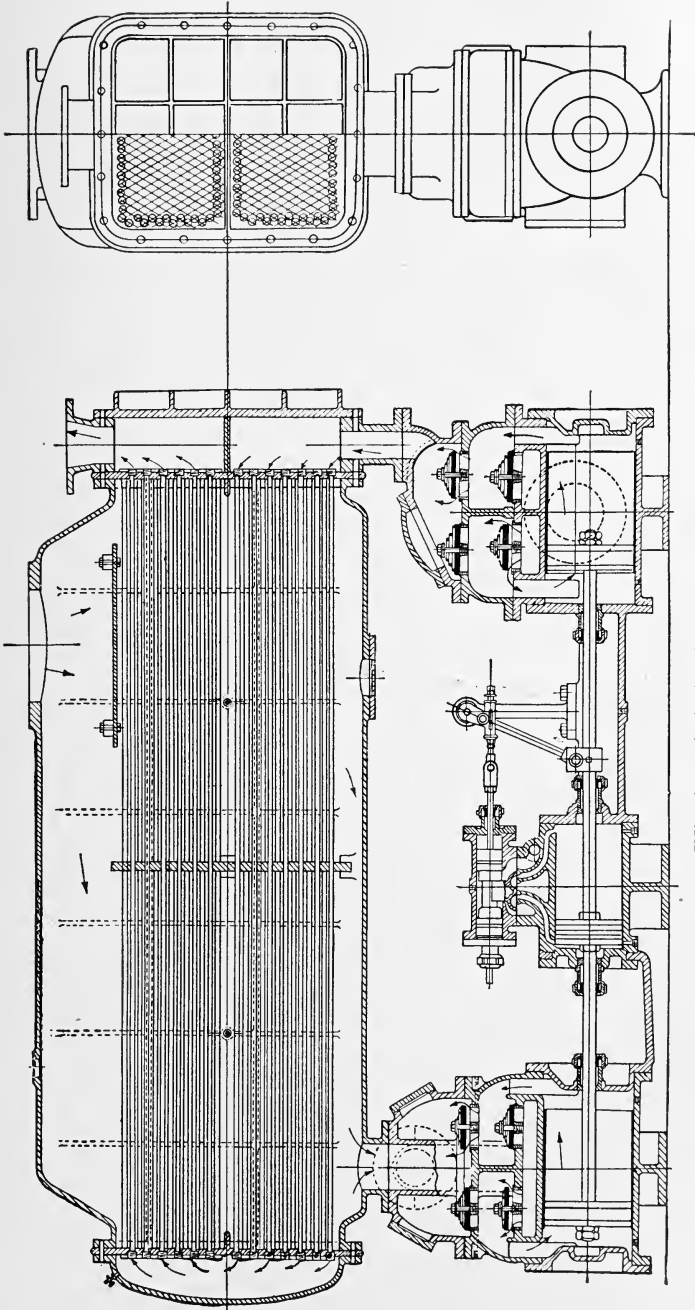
Wheeler Admiralty Surface Condenser and Pumps.
